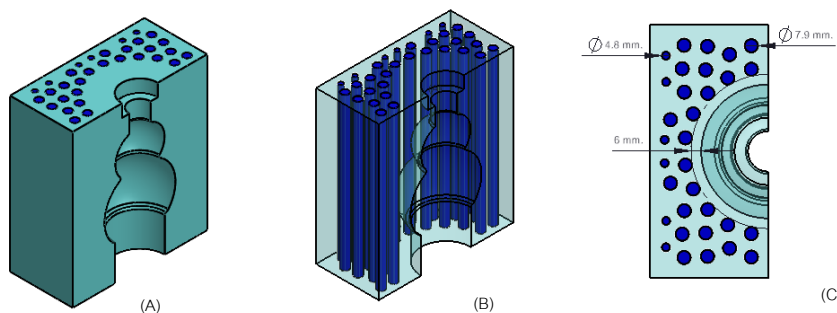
Model 1: Isometric view (A); Mold transparent (B); Top view (C)
